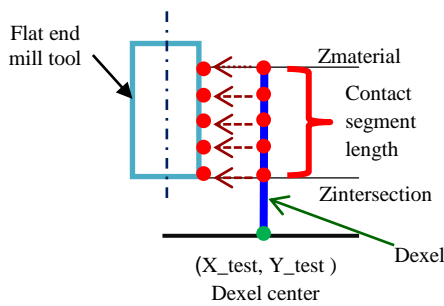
Projected intersection points on flat end tool (horizontal movement).
